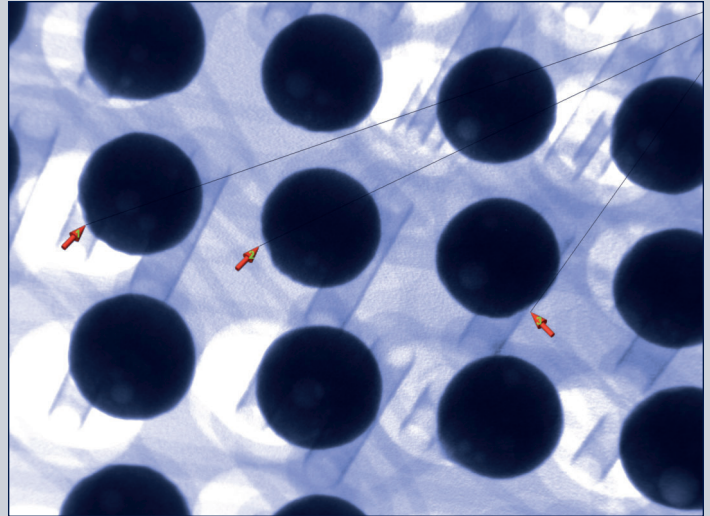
X-ray inspection of BGA showing flattened appearance of several solder balls.
